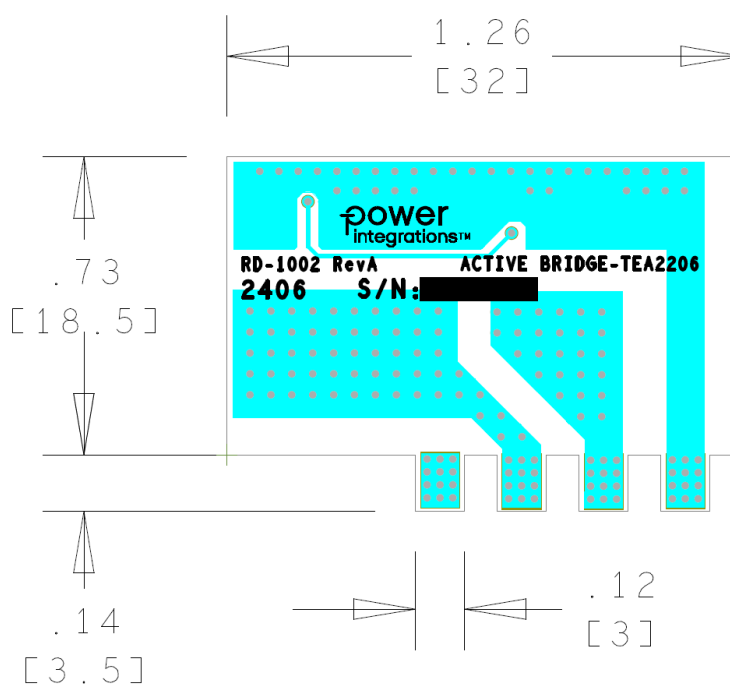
Main Board Printed Circuit Layout, Inner 1.
